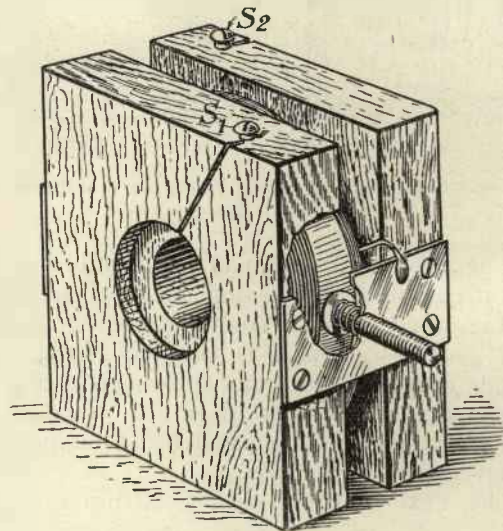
(d) The assembled variometer with bearing plate cut away to show contact spring upon the spindle.
